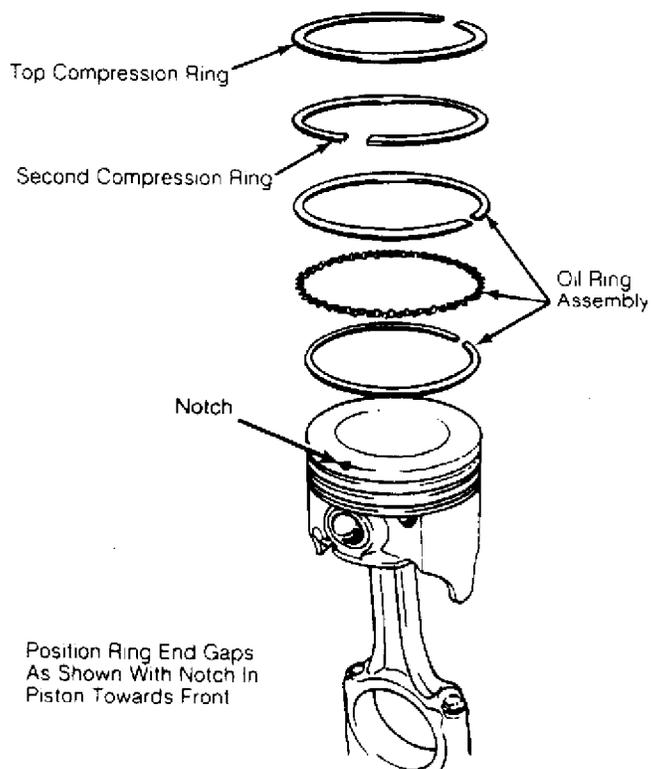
Typical Piston Ring End Gap Positioning - Typical
